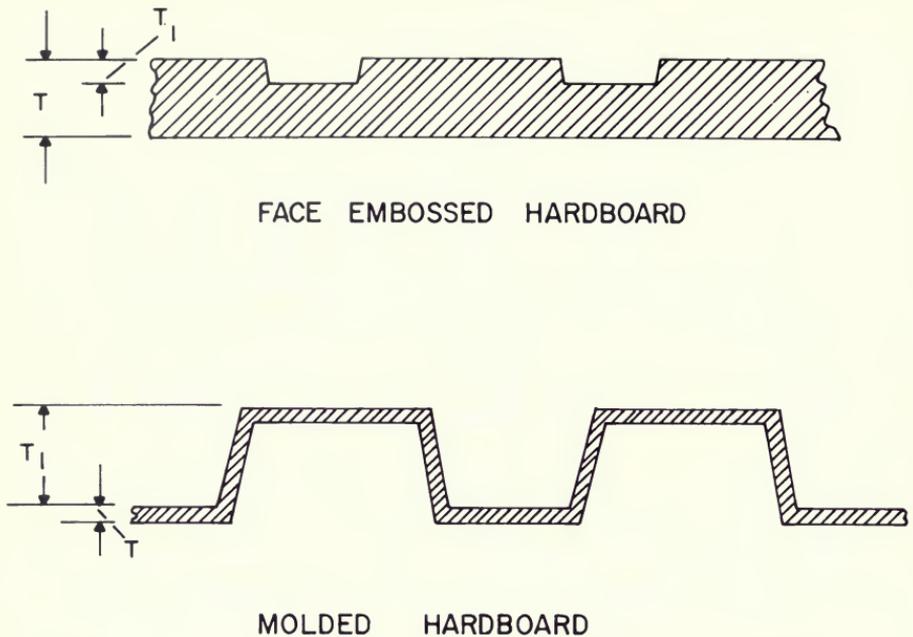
(Top) Face embossed hardboard. (Bottom) Molded hardboard. (Drawing from Suchsland and Woodson 1985.)
